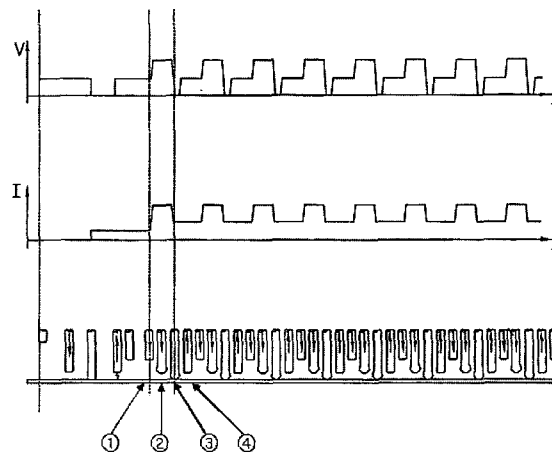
A schematic illustration of welding waveform and wire feeding control of CMT process⁷⁾
